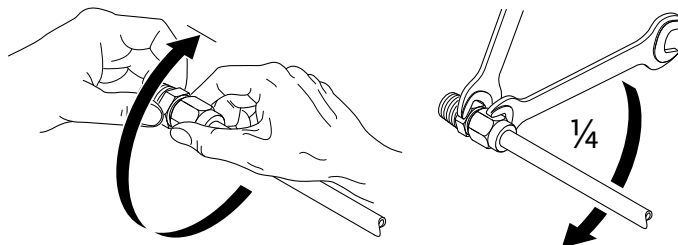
Further turning the clamping ring screw connection by a 1/4 turn
